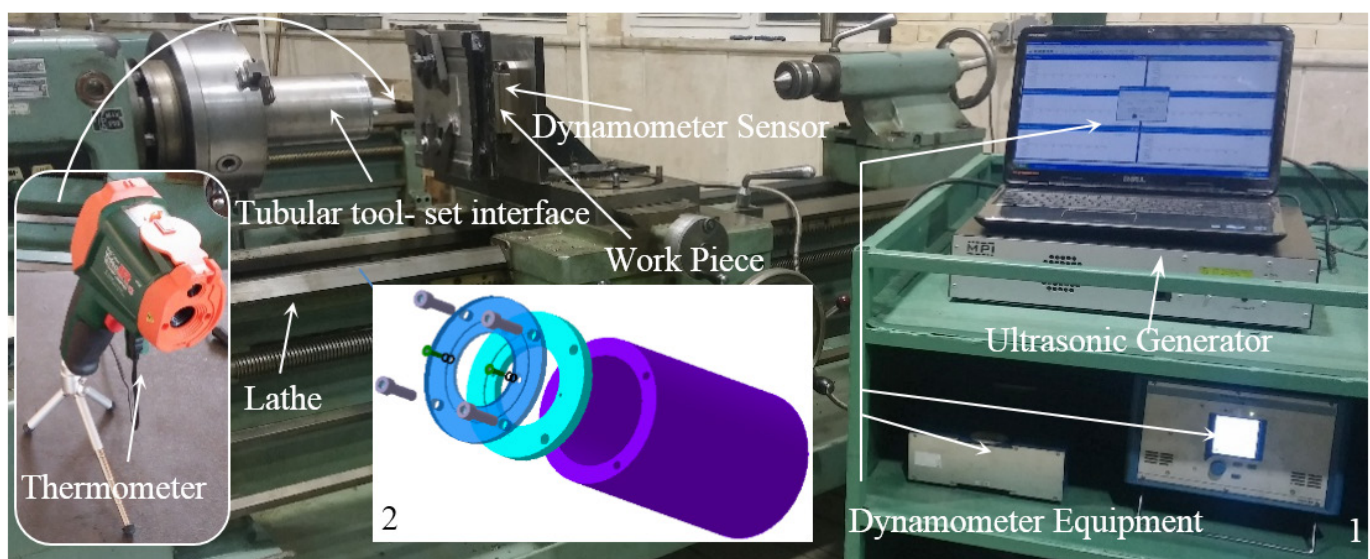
1- Experimental set up of UaFSW process, 2- Tubular interface between the toolset and the lathe chuck
